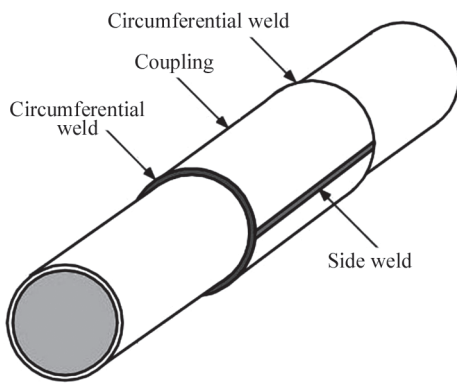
Reinforcing a defective pipeline section with a welded coupling
